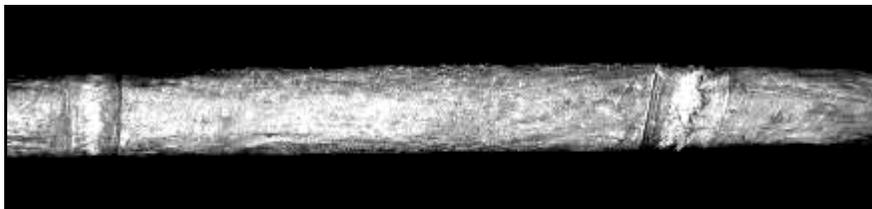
Steel 17043STi – detail of notches Nos. 4 (left) and 5 of rolled sample No. 84 (800 °C)
